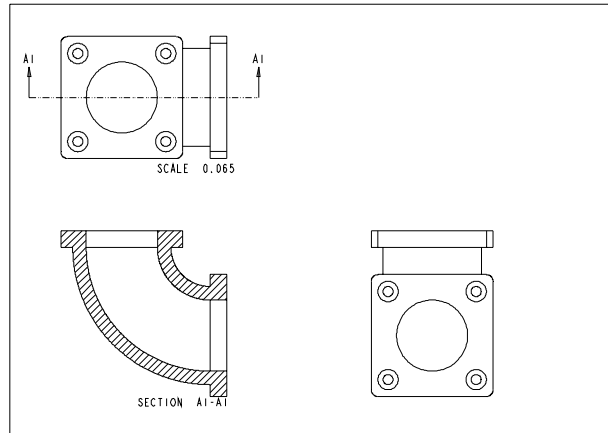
The drawing sheet after generating the top, sectioned front, and right-side views
